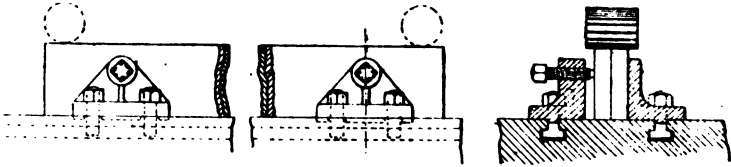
Edge Mill operating on Two Thin Strips clamped between Angle Brackets.
